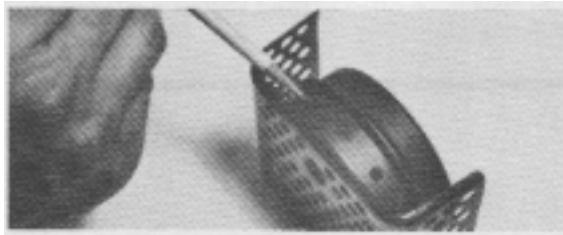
Exhaust exit holes in muffler should be free from carbon build-up. Suggest to use small wire to clean this area when necessary.
